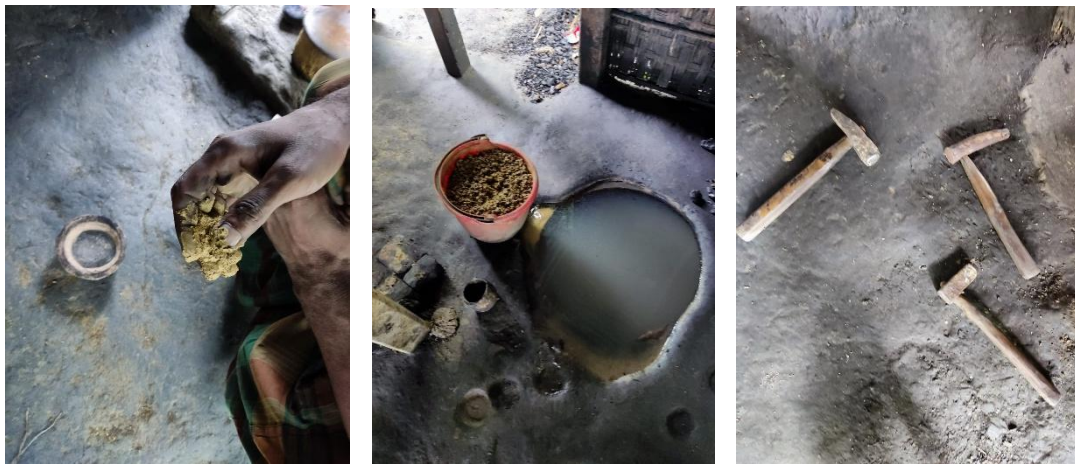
Traditional brass and bell making is still focused on simple, handmade tools and ancient techniques: a clay pot or crucible (as melting pot), a small charcoal-heated pit furnace, and clay or sand molds for casting (including lost-wax casting for more
